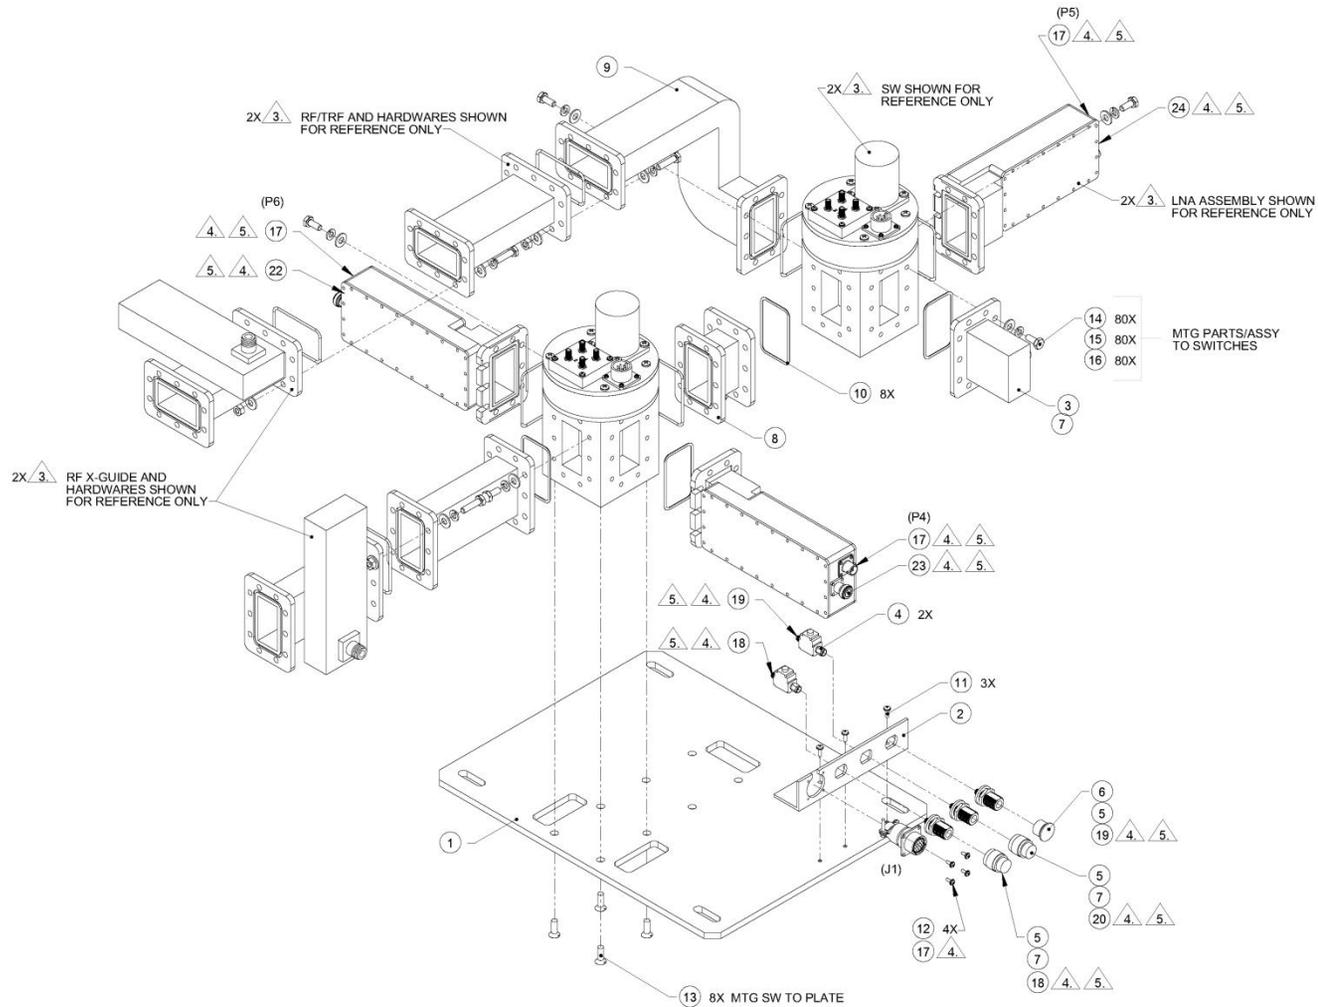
C-Band LNA 1:2 Redundant System (Exploded View)
